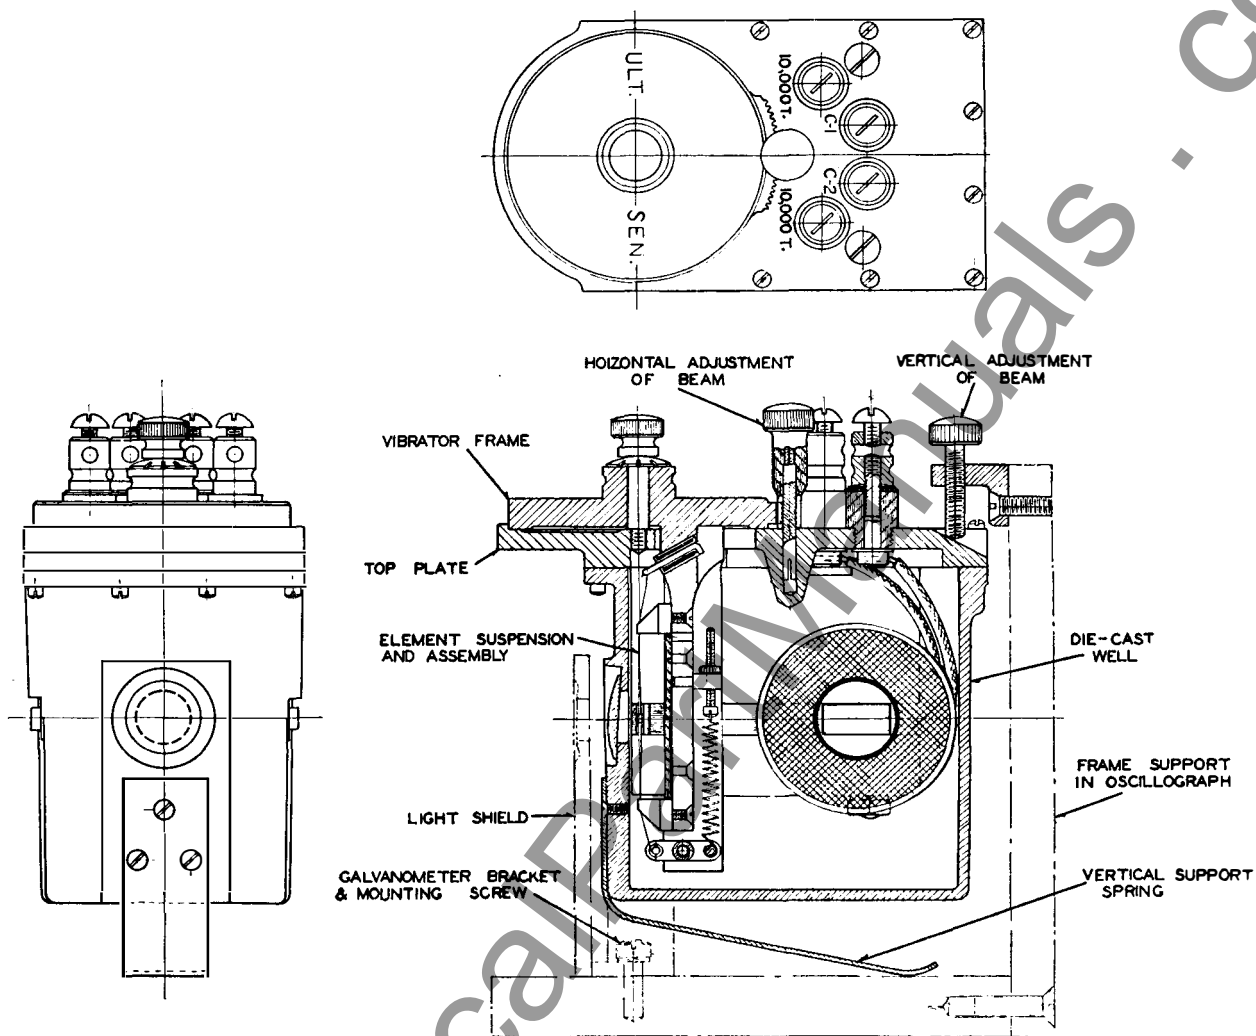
TOP AND FRONT OUTLINE VIEWS AND A SIDE CROSS-SECTIONAL VIEW OF THE ULTRA-SENSITIVE GALVANOMETER COMPLETE MOUNTED IN THE OSCILLOGRAPH, SHOWING DETAILS.
